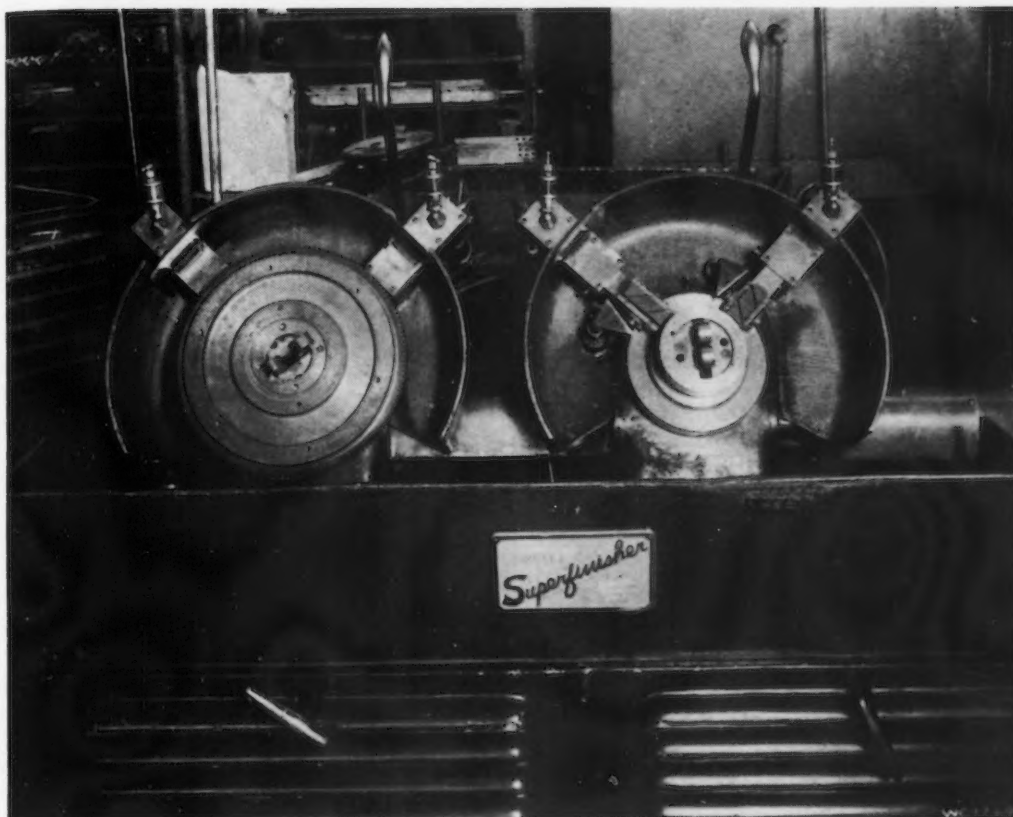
A—Detail of Superfinishing stone holder for cam work.
